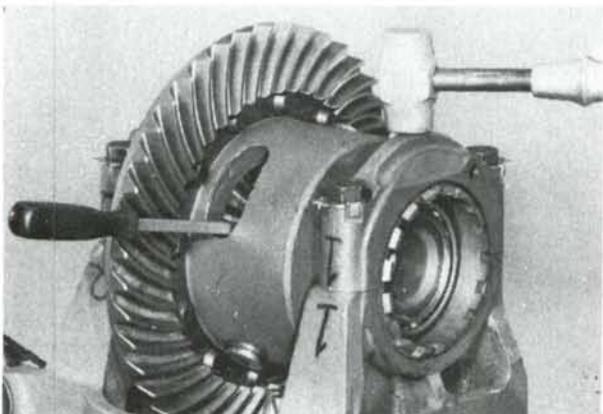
Place a screwdriver into a slot in differential case and rotate ring gear so screwdriver is in a horizontal position. Tap bearing caps with a soft hammer to seat bearing. Refer to paragraph 274 for bearing adjustment procedure.
